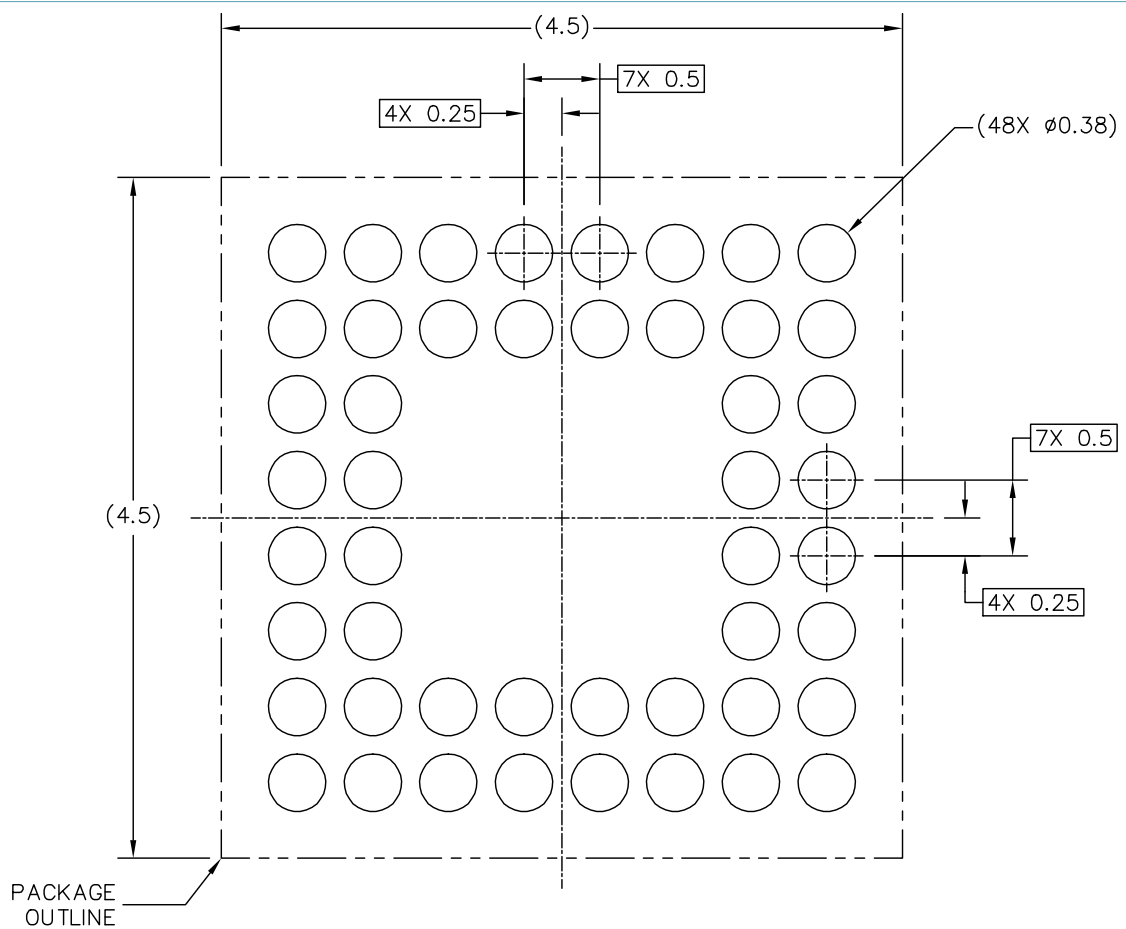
Package outline TFBGA48 (SOT1155-1)
